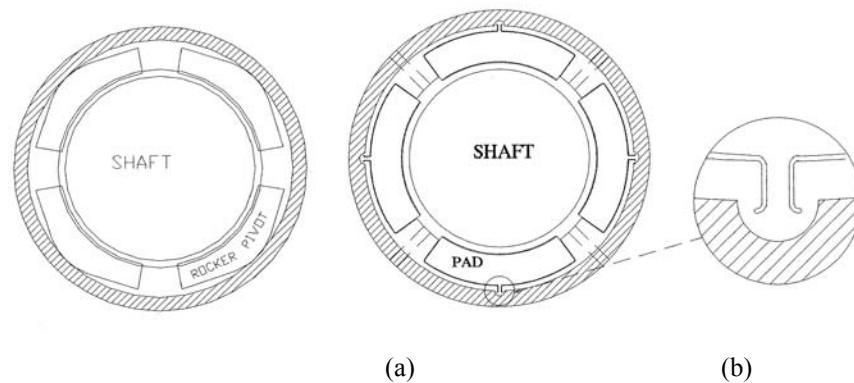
Tilting pad bearing a) rocket pivot b) flexure pivot [5]
